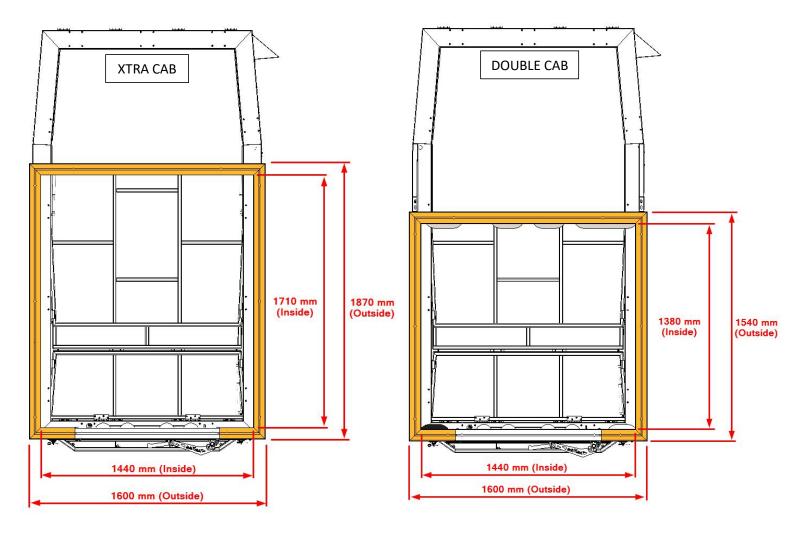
Canopy Camper Base Unit Mounting Surface - Dimensions (Bottom View)
